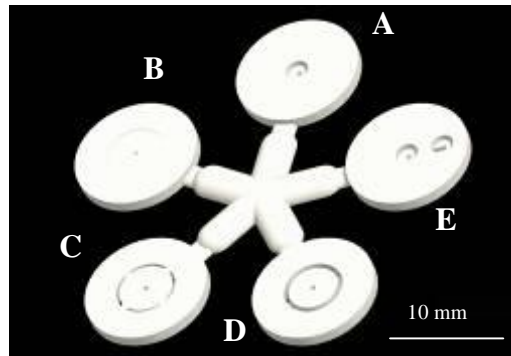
Design of the injection moulded component discs (after Marson 2009b)
